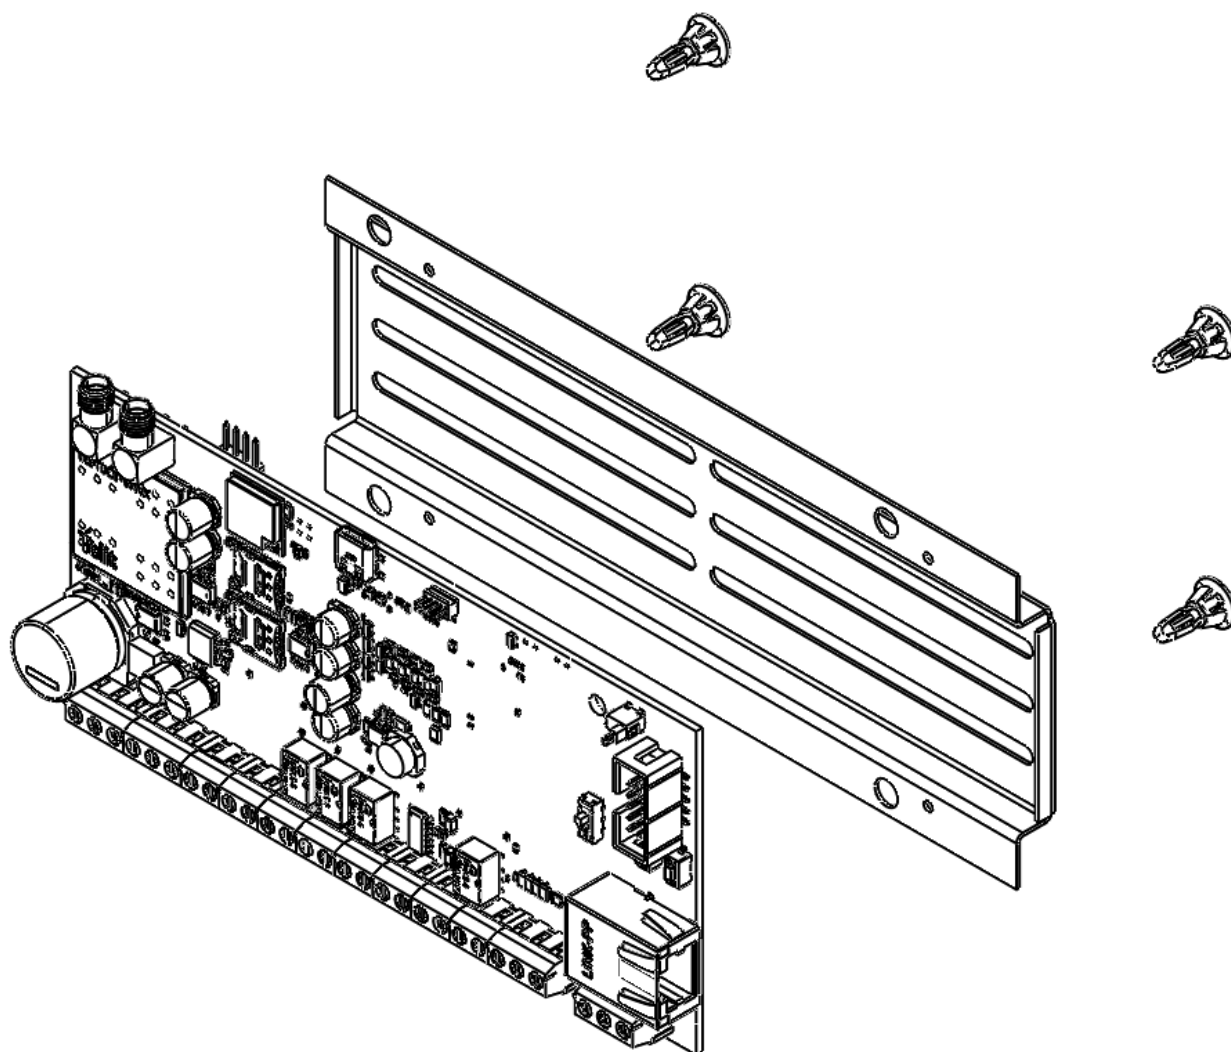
Optional mounting method of bare ADC-FC100-Tx PCB onto mounting bracket.
